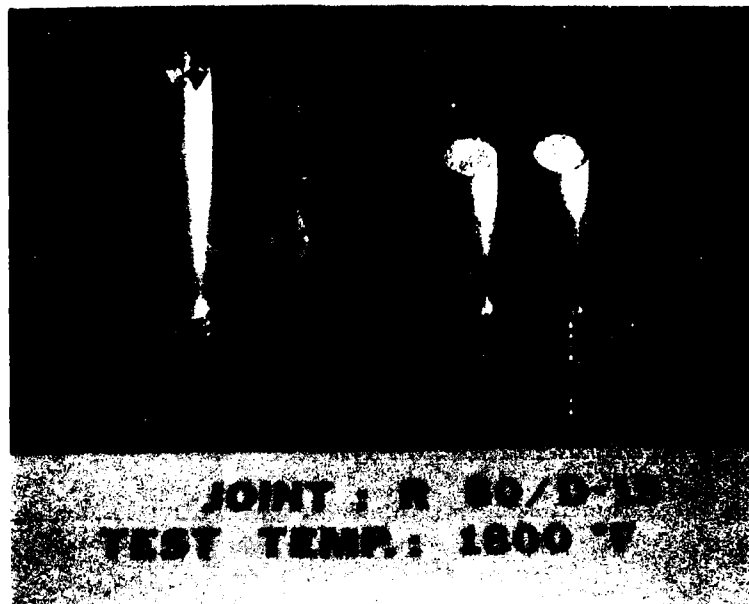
Fractures of René 80 (D-15), 0.015 inch Wide Butt Joints by Tensile Test at 1800°F.
